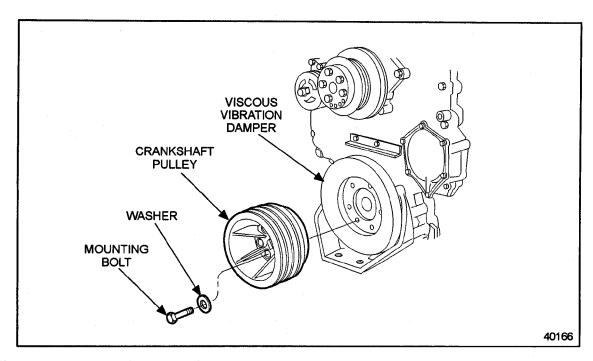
Crankshaft Pulley Mounted Directly to the Crankshaft
